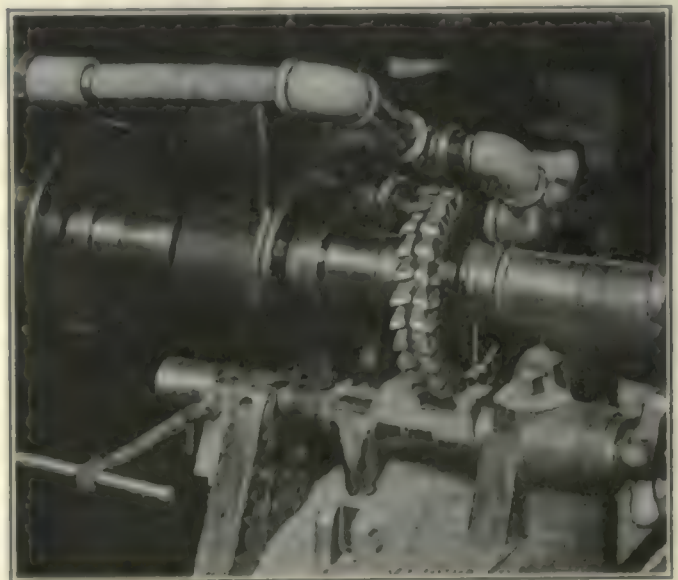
FINISH-MILLING BOTTOM AND SHOULDER
